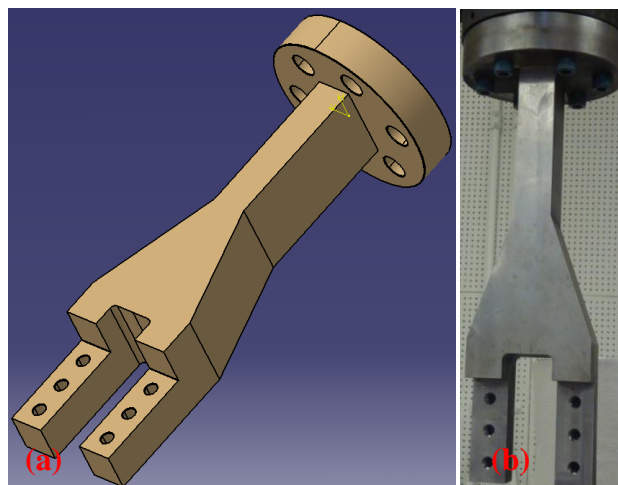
(a) CAD model of fixed upper part of cyclic shear fixture (b) photograph of fixed upper part of cyclic shear test fixture
